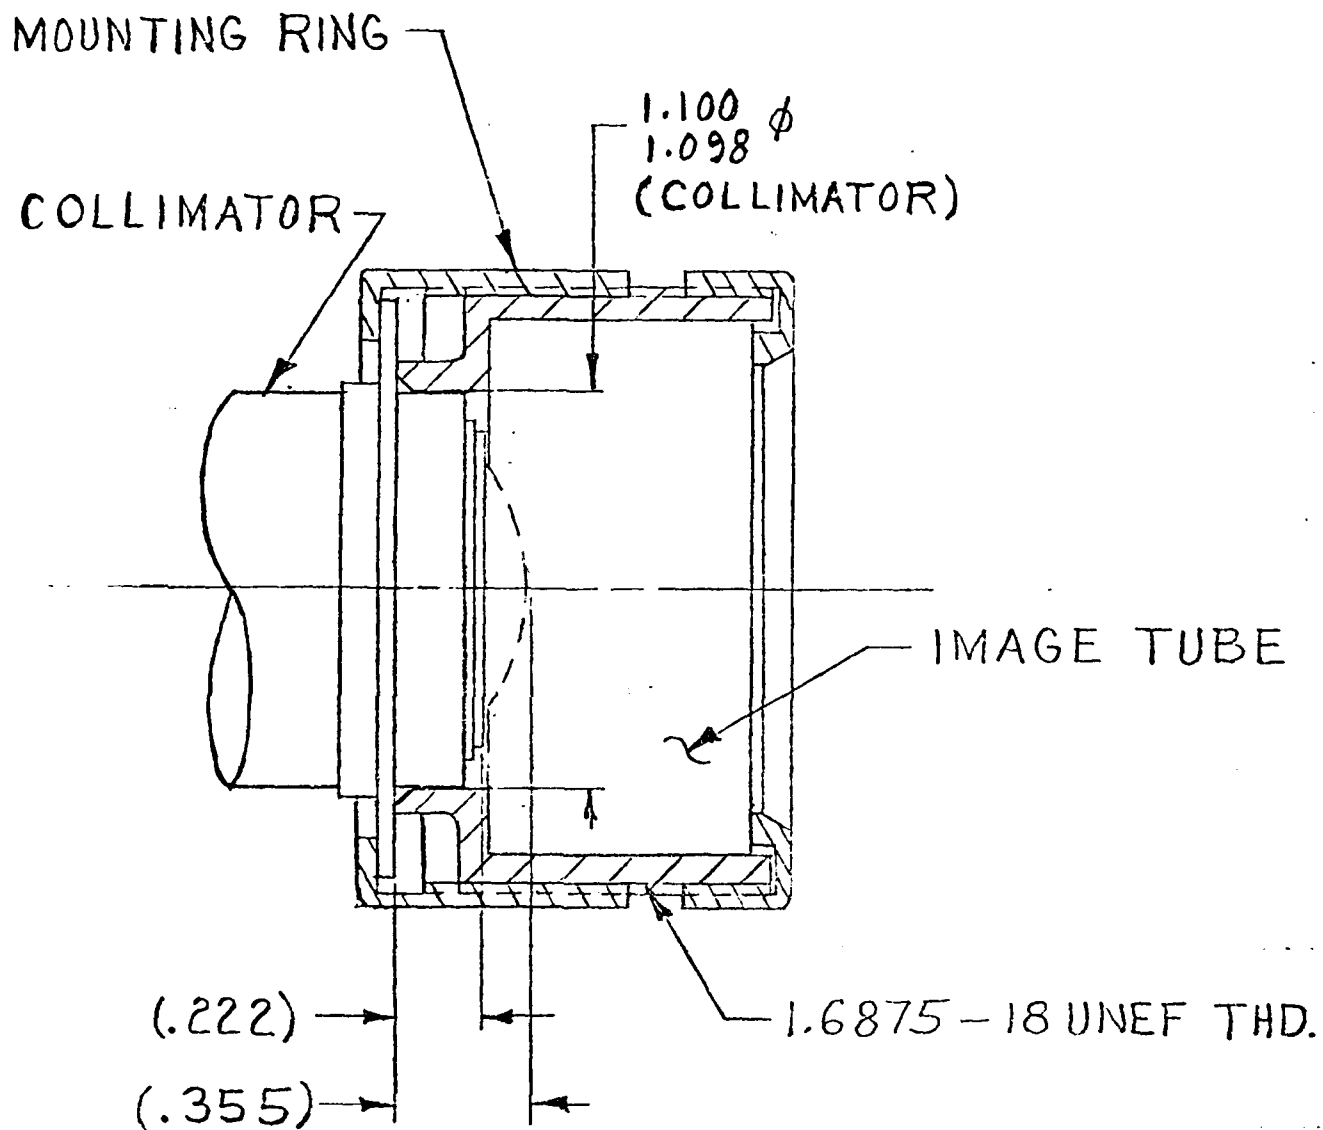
Interface Dimensions - 18mm Wide Angle Cyclops Eyepiece
